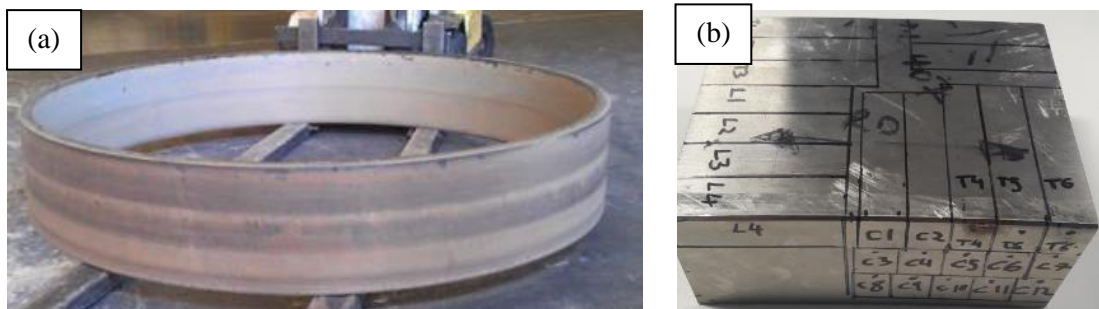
(a) The original TI-407 manufacturer 1 125 inch ring, and (b) The block from which testing specimens were extracted.
